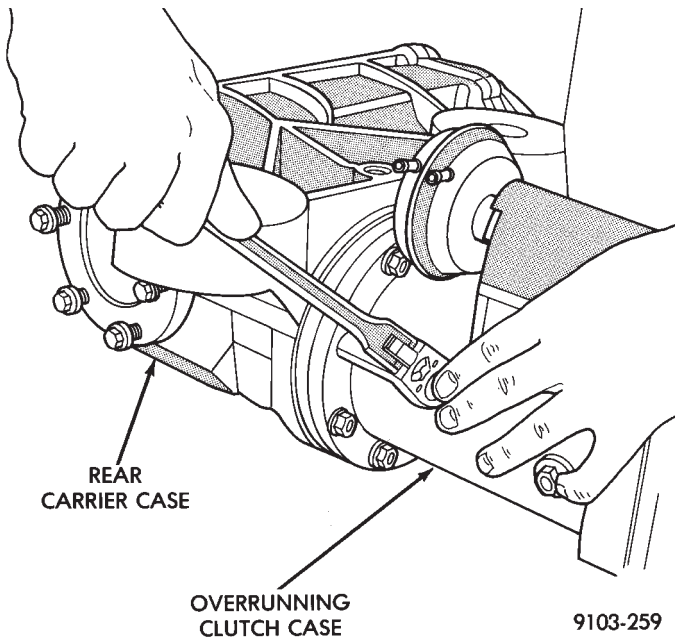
Overrunning Clutch Case to Rear Carrier Bolts
